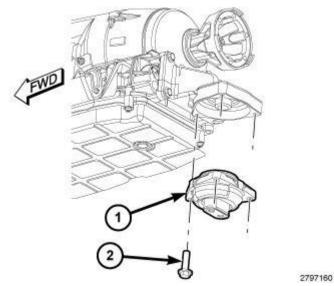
Rear Engine Mount Isolator & Bolts (4x2)
